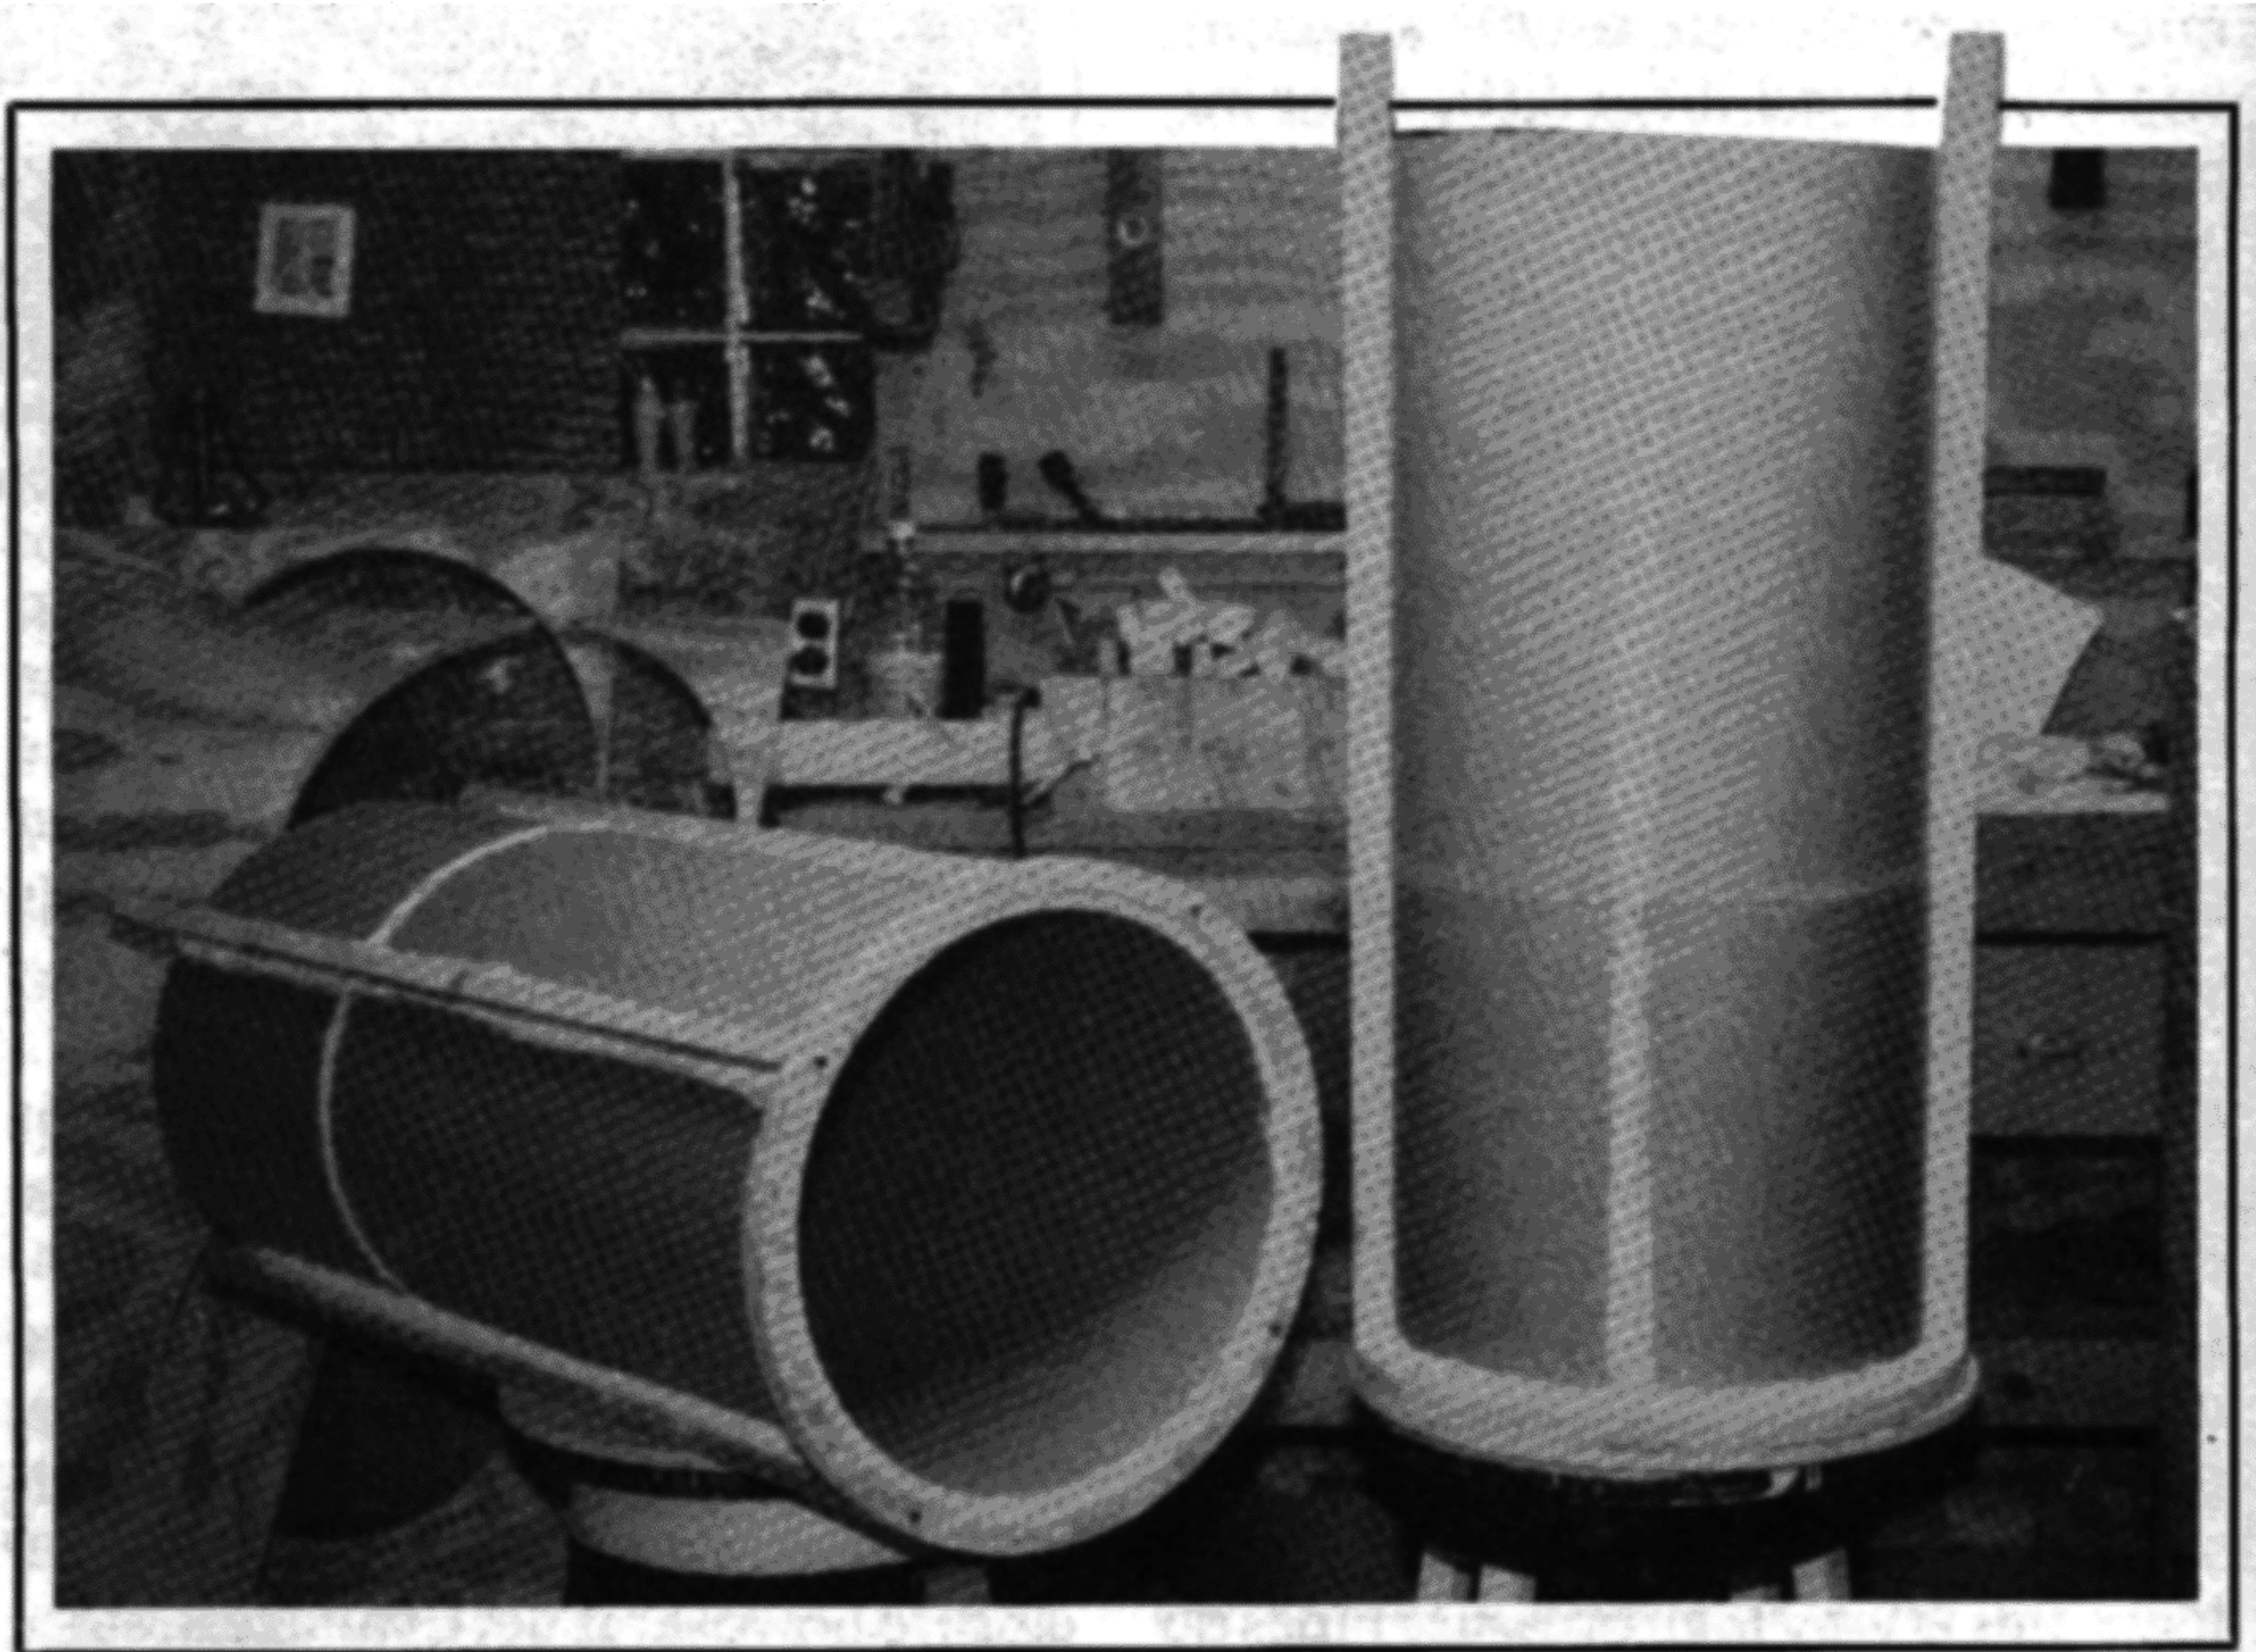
The inner tube assemblies, complete with pine spacers, ready for installation into the outer tubes.
